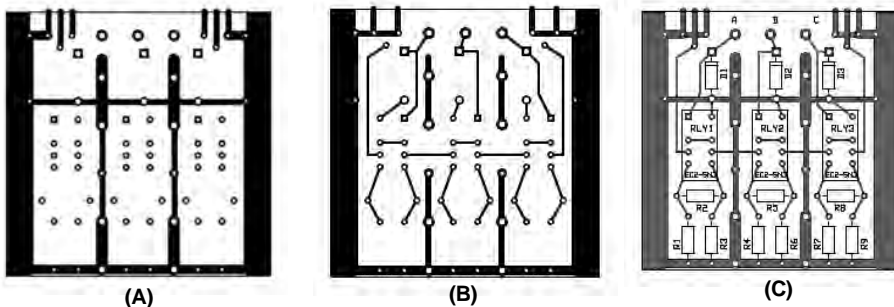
Step attenuator PC board, (A) top layer, (B) mirrored bottom layer, (C) full layout. The board is 2.185 inches wide and 2.20 inches tall.
